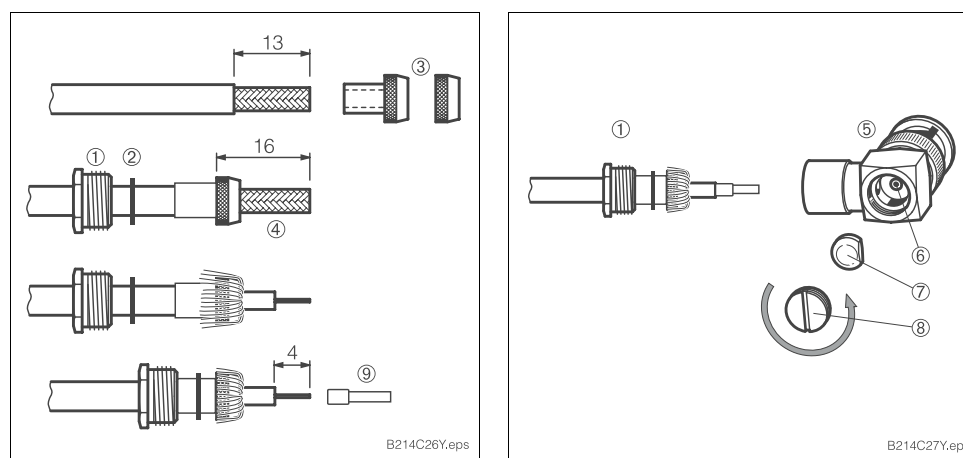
Termination of pH terminal wire for mounting the BNC angular connector (left)
